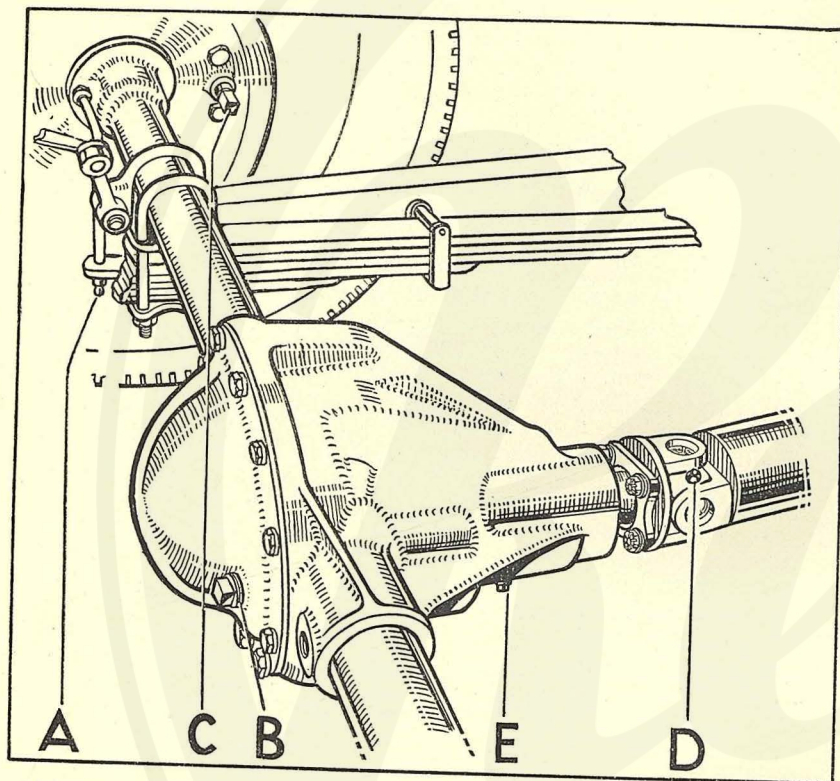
Rear Axle. A, lubricator for hub bearing; B, oil filler plug and level indicator; C, rear brake adjuster; D, lubricator for universal joint (rear end of propeller shaft); E, drain plug.
